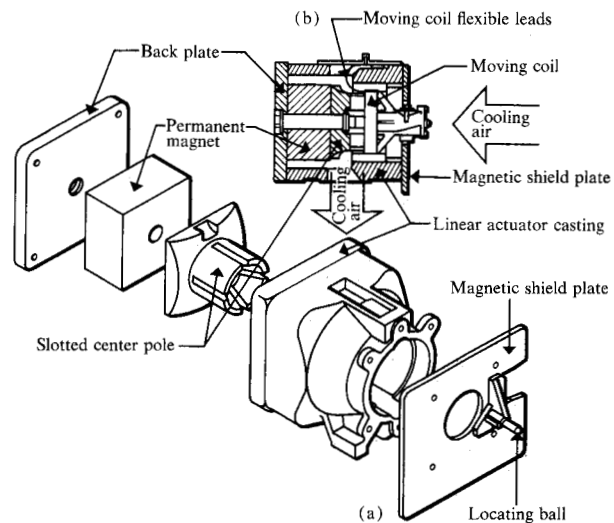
Final design of magnetic structure for actuator. (a) Concentric magnetic assembly located behind air gap, exploded view showing center core, permanent magnet, and housing; (b) view of actuator showing magnetic structure, moving coil, coil leads, etc.
